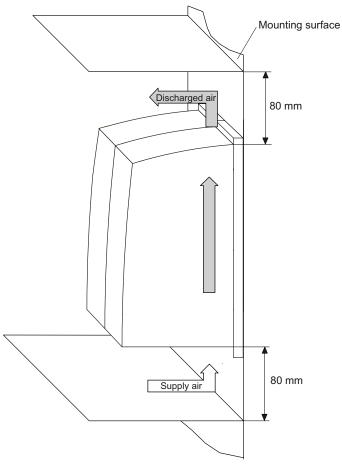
Cooling clearances for Motor Modules Booksize Compact
